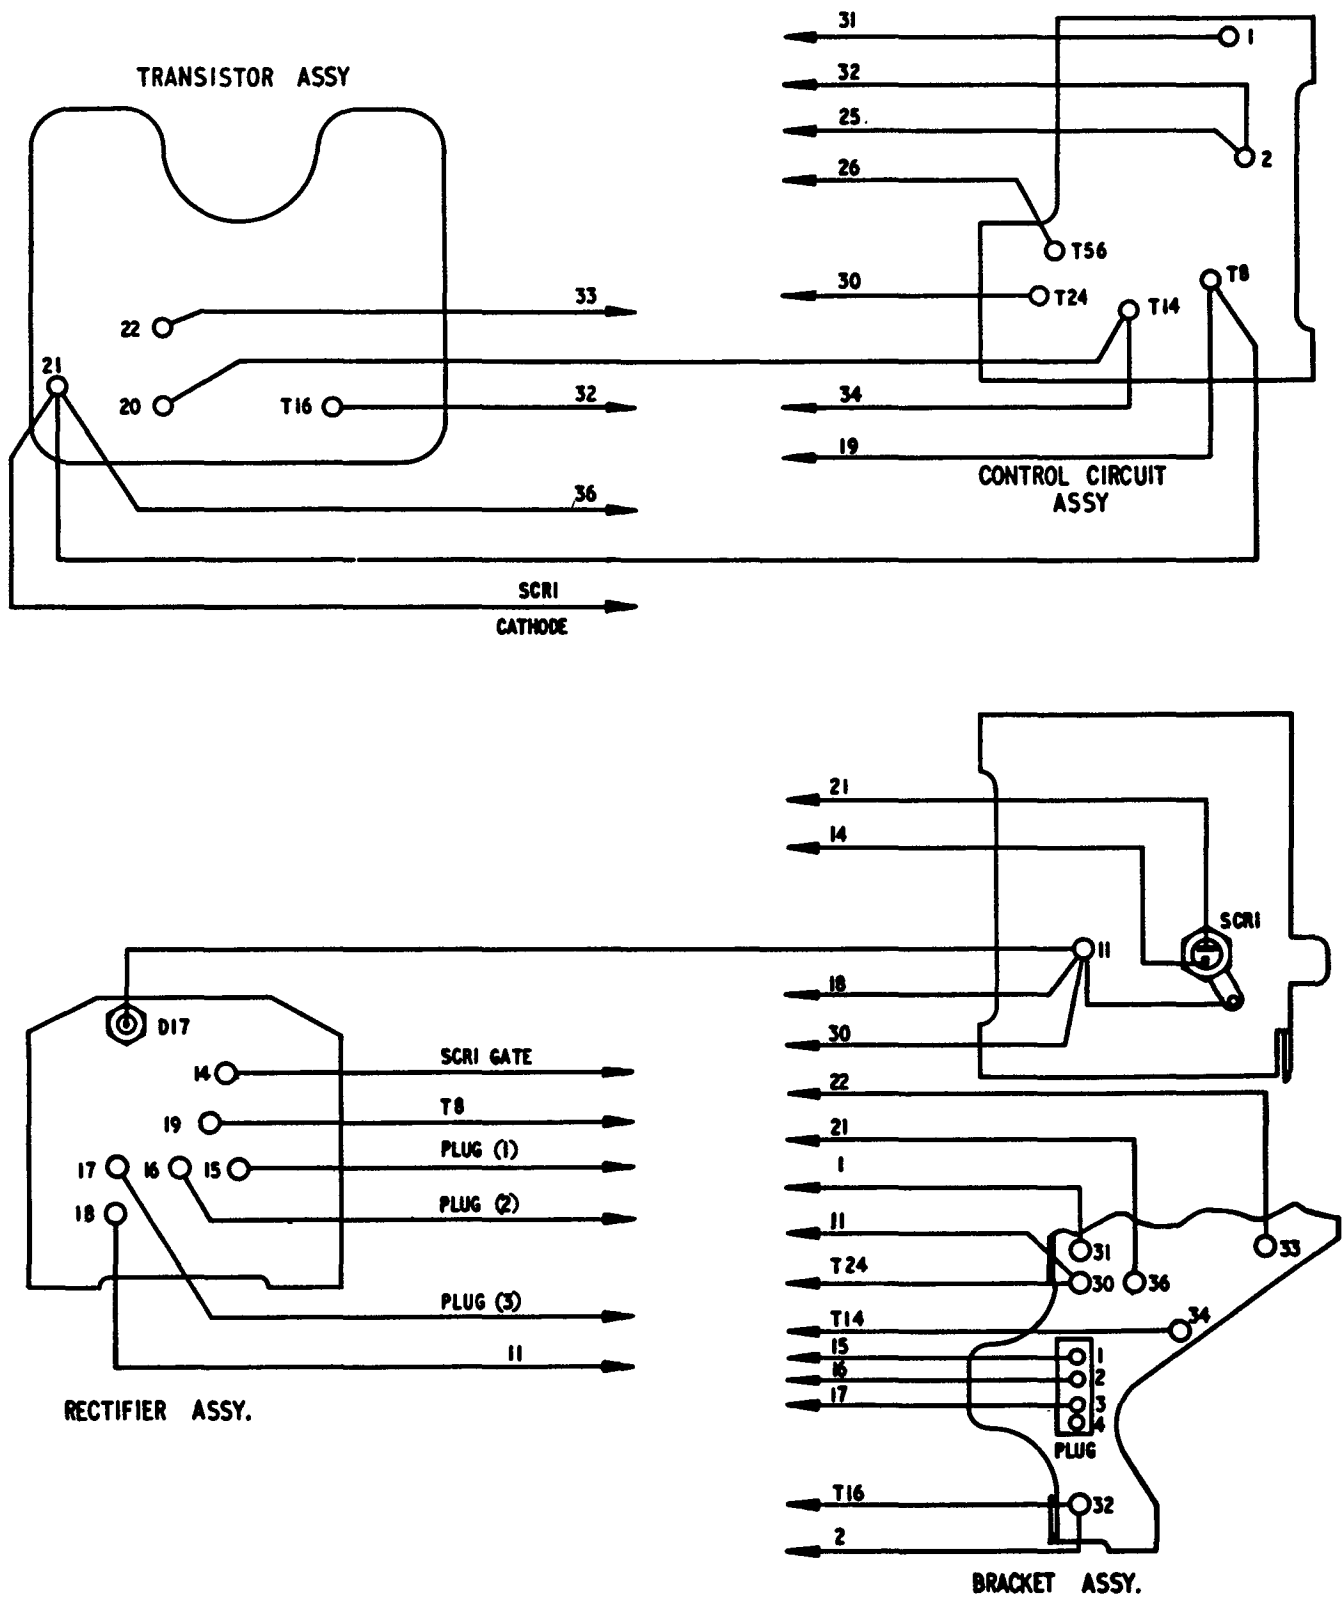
Generator, d.c., rectifier board and bracket assembly
